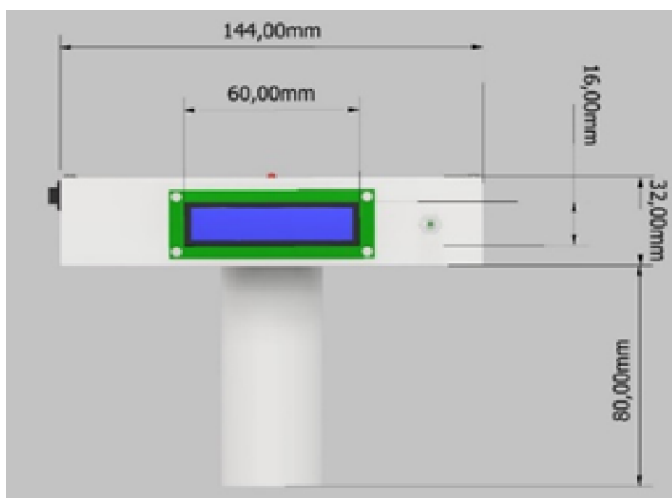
Front view of 3D CAD design of the infrared thermometer
